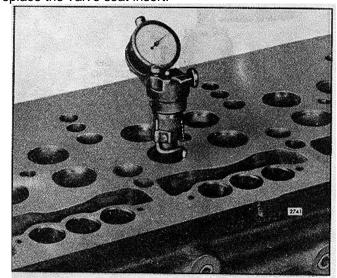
Determining Concentricity of Valve Seat Insert with Dial Indicator
